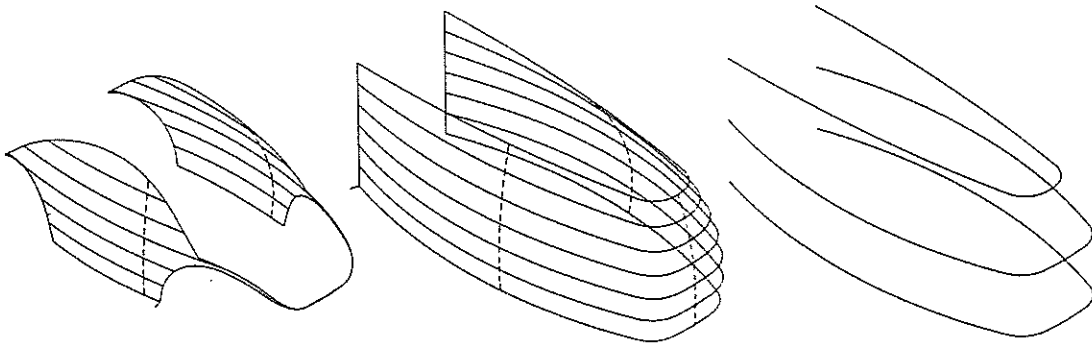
Trimmed surface, base surface, and wires for the side surface
